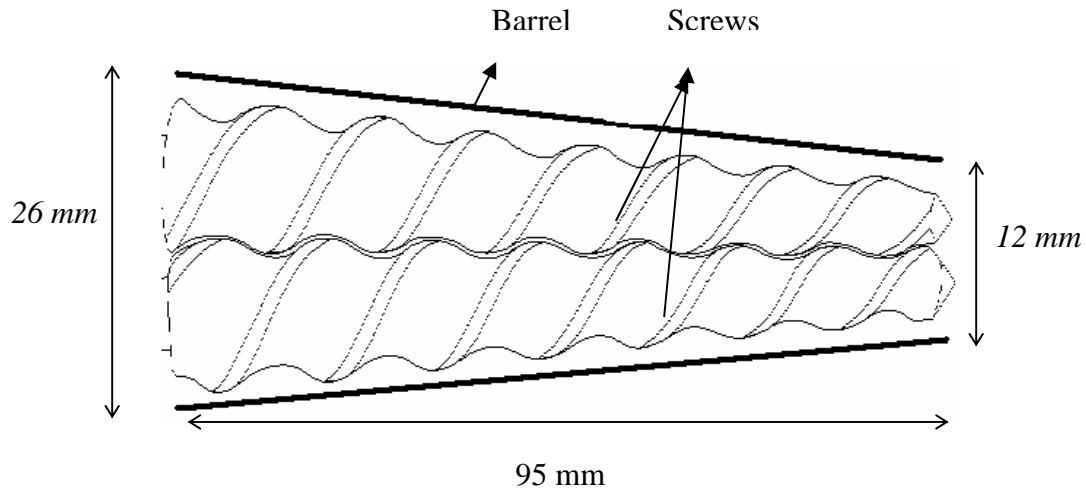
Dimensions of the conical twin-screw micro-extruder. Screws shown in horizontal plane.
